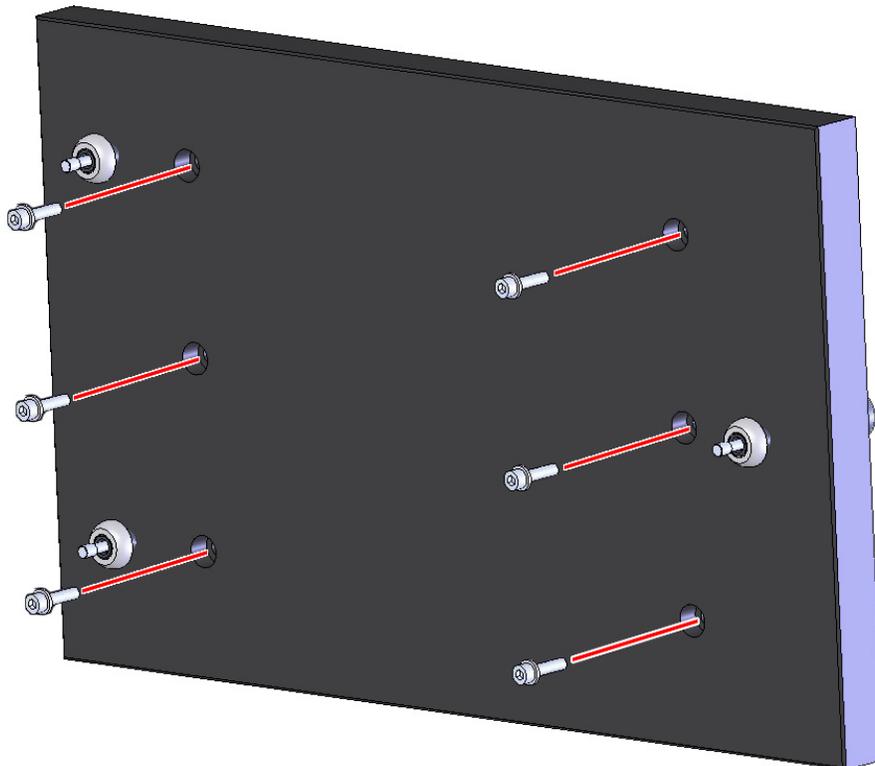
Mounting the Vacuum Chuck Base Plate
